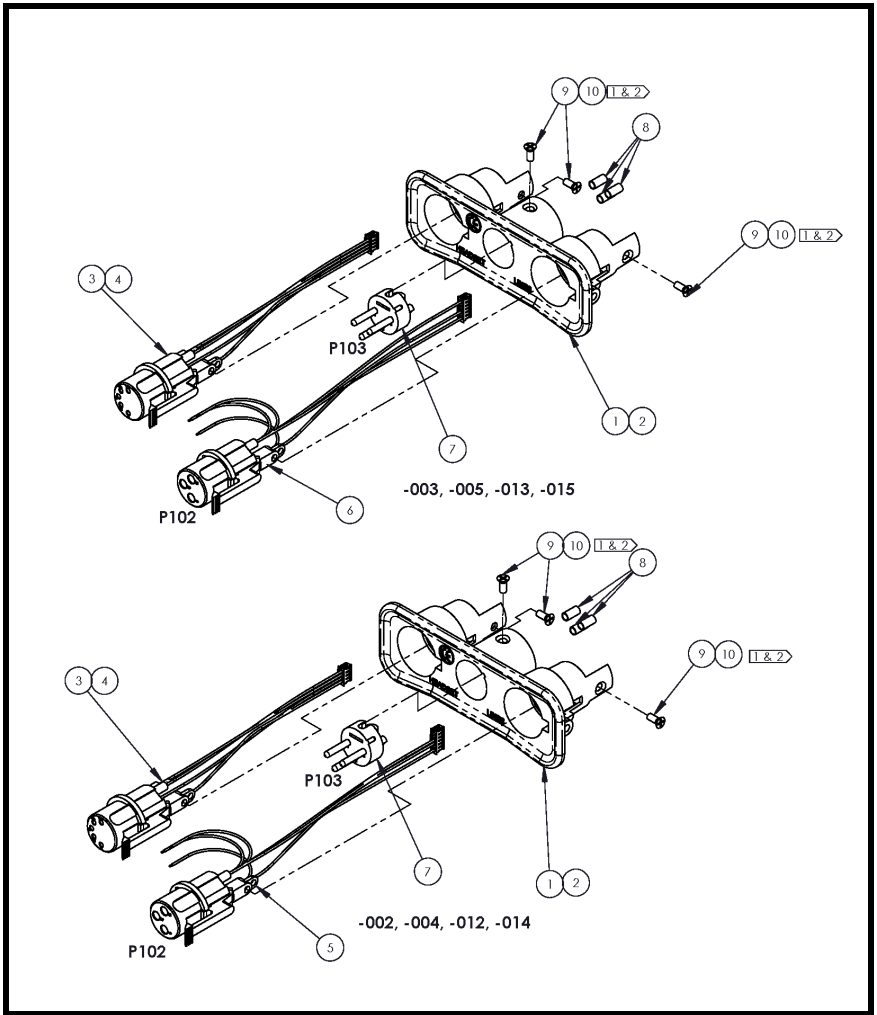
Connector Plate Assembly, BP-319 and BP-351 - 90207486000
